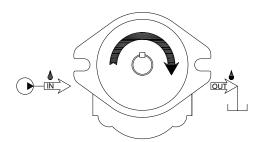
[IN] & [OUT] \*Motor Viewed From Shaft End
